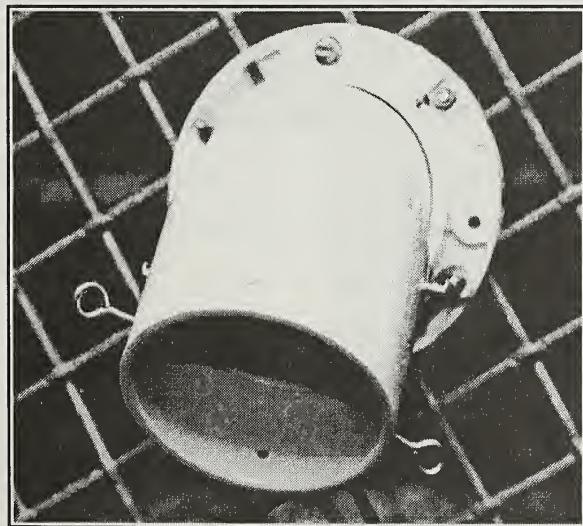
Elbow section is fit to flange assembly and secured with two bolts from the inside, nuts on the outside. Holes were drilled in place through both pieces. (Photo by Cathy Burkey)
